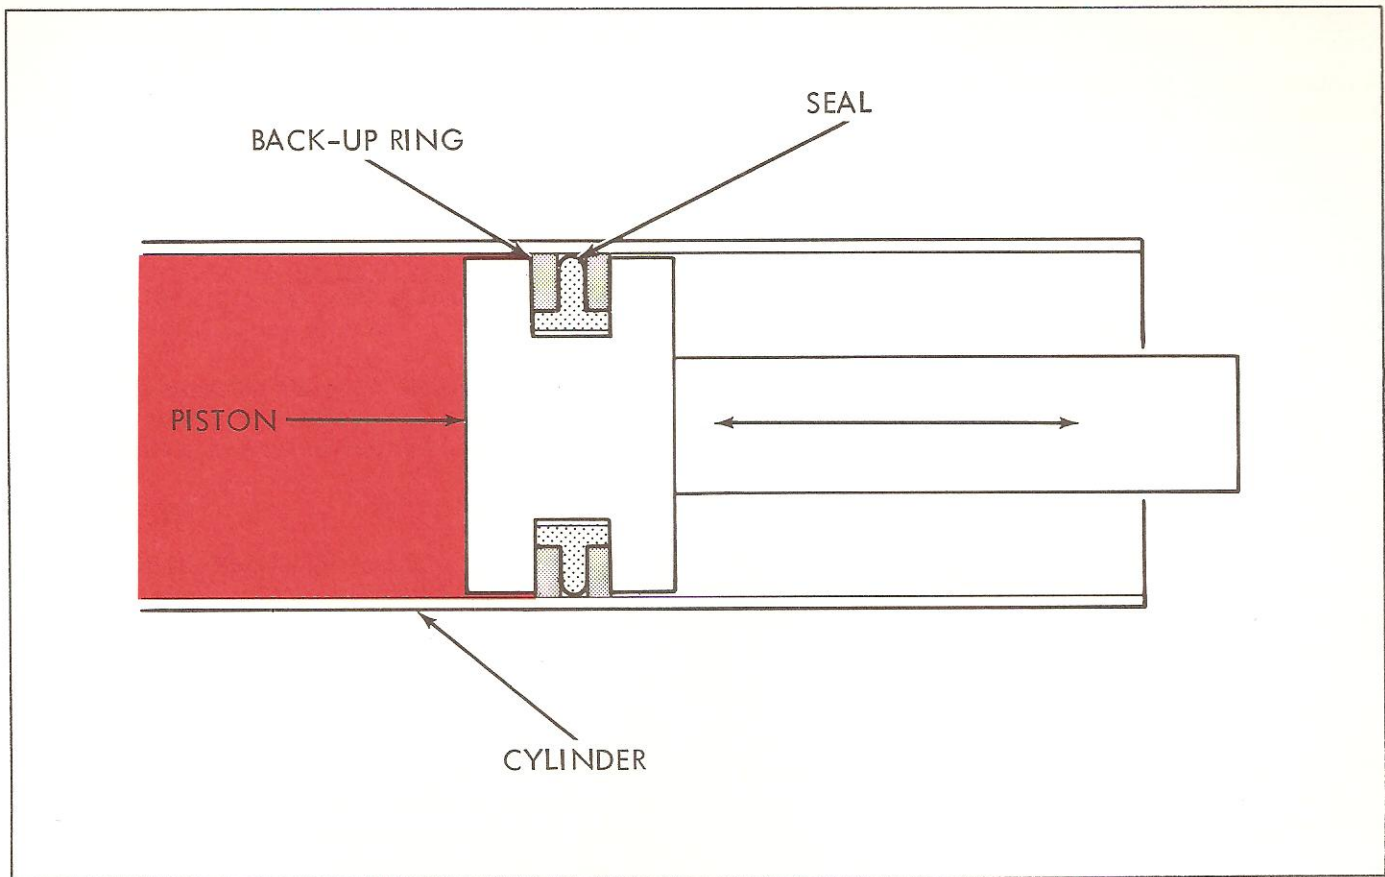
T-Ring is a Dynamic Seal for Reciprocating Parts
